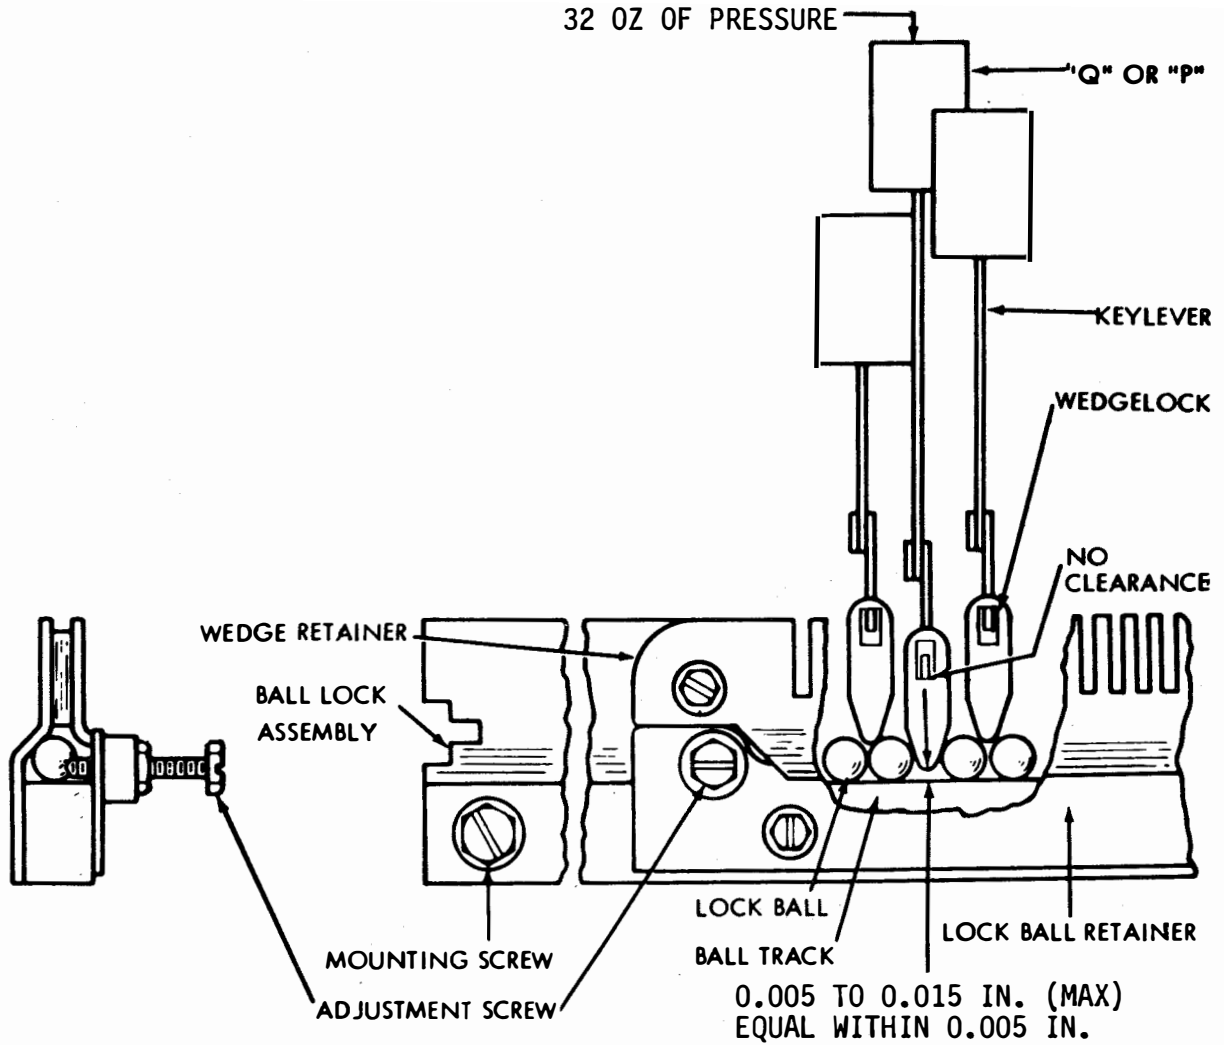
Ball Wedgelock and Ball Track Clearance (Preliminary)
